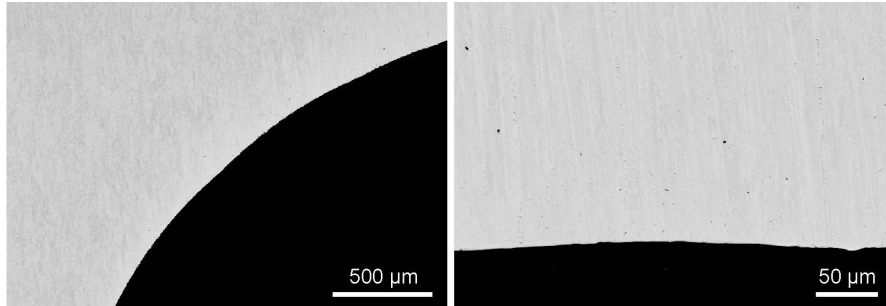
BSE micrographs of cross section of a curved surface machined by milling showing no defects.
